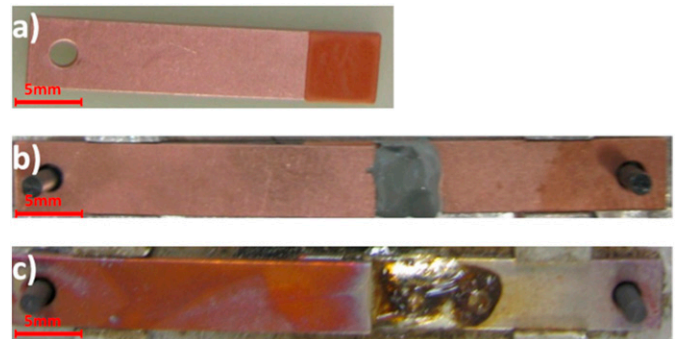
Production of intermetallic connection of the remelting test sample: (a) printing of copper paste, (b) dispensing of solder paste, and (c) after soldering.
